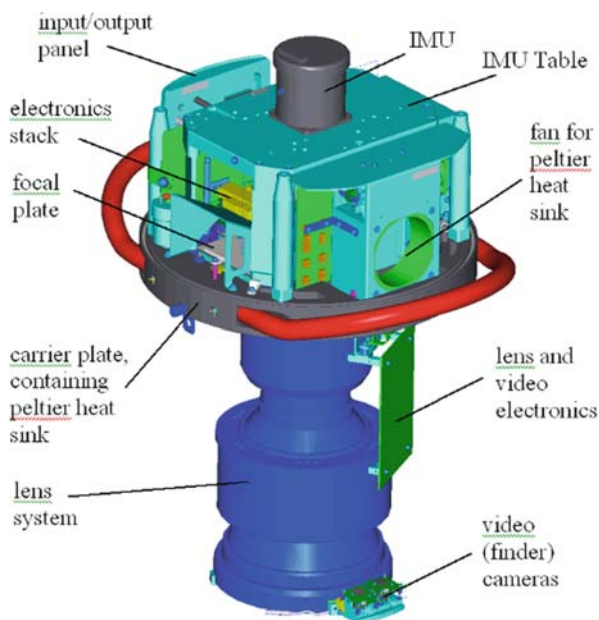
View of the SH52/SH82 Sensor Head without housings
